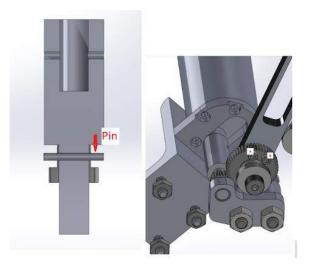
This figure shows a cross section of the motor shaft and input gear assembly where the pic transfers the torque from the drive shaft to the gear. The right image is a bottom view of the transmission highlighting the two screws that will be transferring the drive shaft torque, through the transmission gears, into the driving link.
